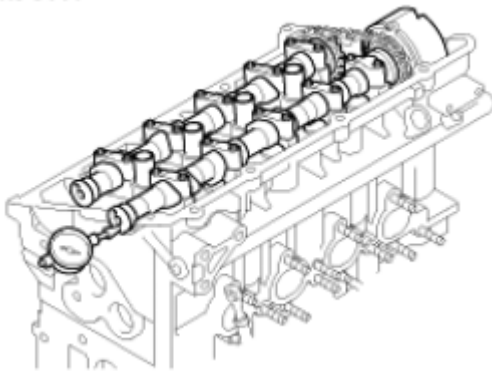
Measuring Camshaft End Play Using Dial Indicator
